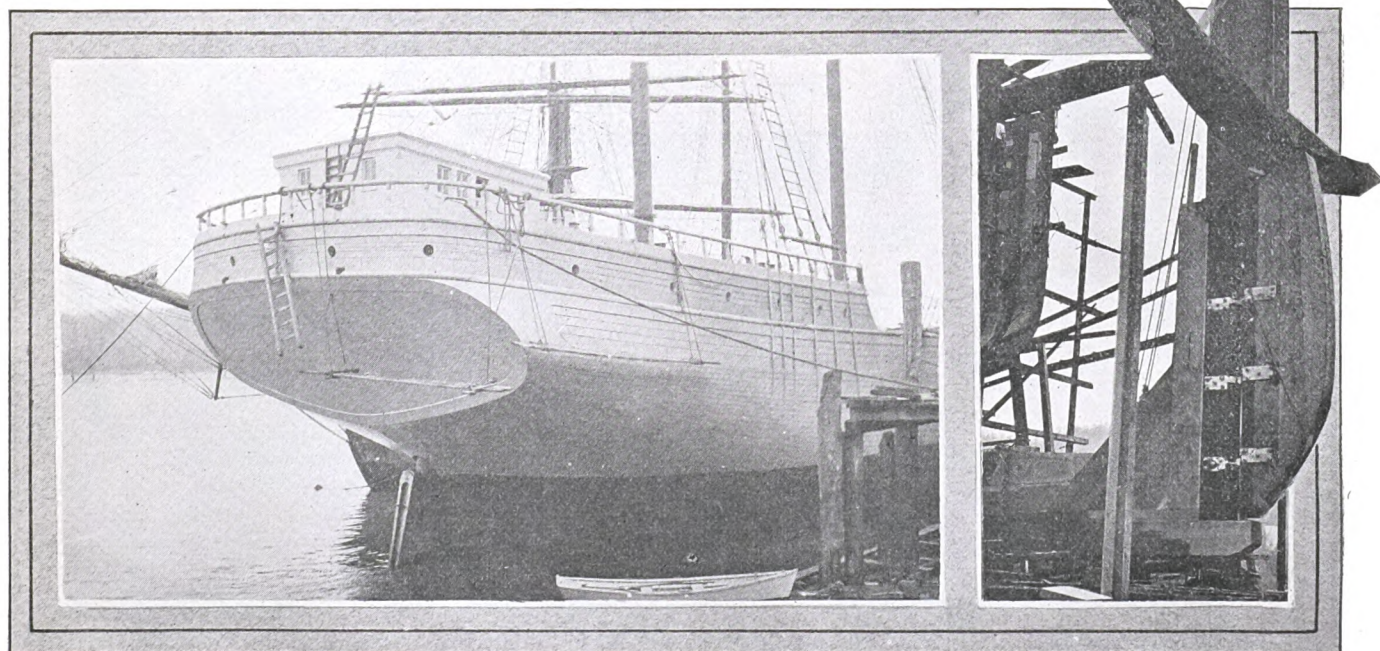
FINISHED TRANSOM STERN ON A 5-MASTED MOTOR SCHOONER. FIG. 102—DETAIL OF RUDDER AND RUDDERPOST ASSEMBLY
